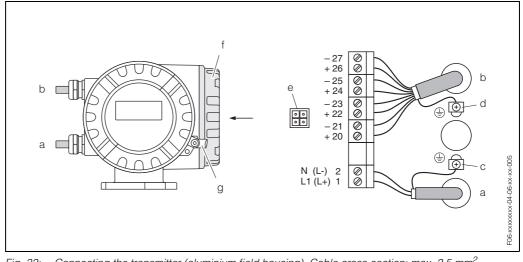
Connecting the transmitter (aluminium field housing). Cable cross-section: max. 2.5 mm²
